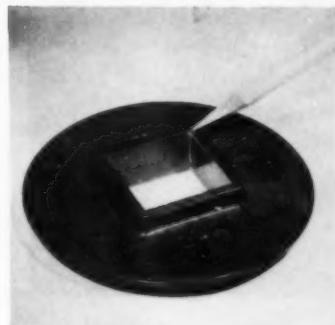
Molded flange with square cored hole gives stubborn trouble with fine cracks at corners.
